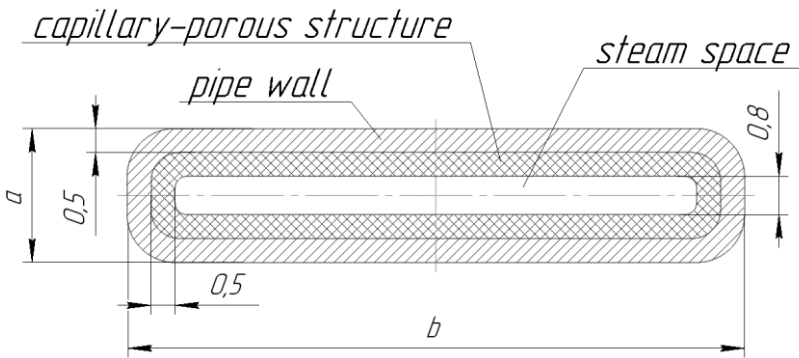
Cross section of a flat heat pipe (dimensions in mm)
